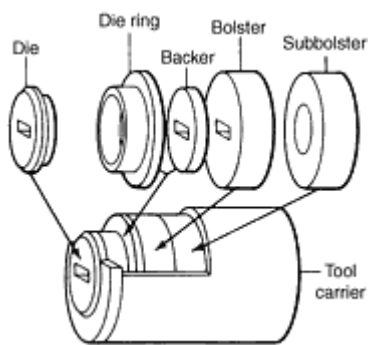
Typical extrusion die assembly, showing relative positions of components in a tool carrier
